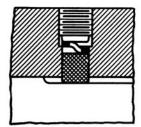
A lock washer under the hollow headless screw locks both the screw and plug in place.
